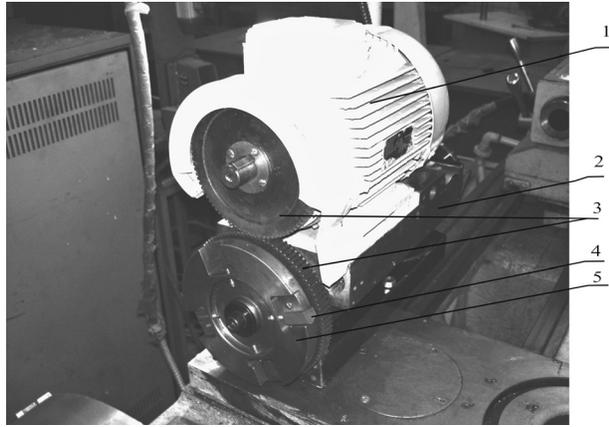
Tool spindle for slotting: 1—AC motor, 2—spindle housing, 3—gears transmitting torque from the AC motor to the spindle, 4—DC insert, and 5—tool block
